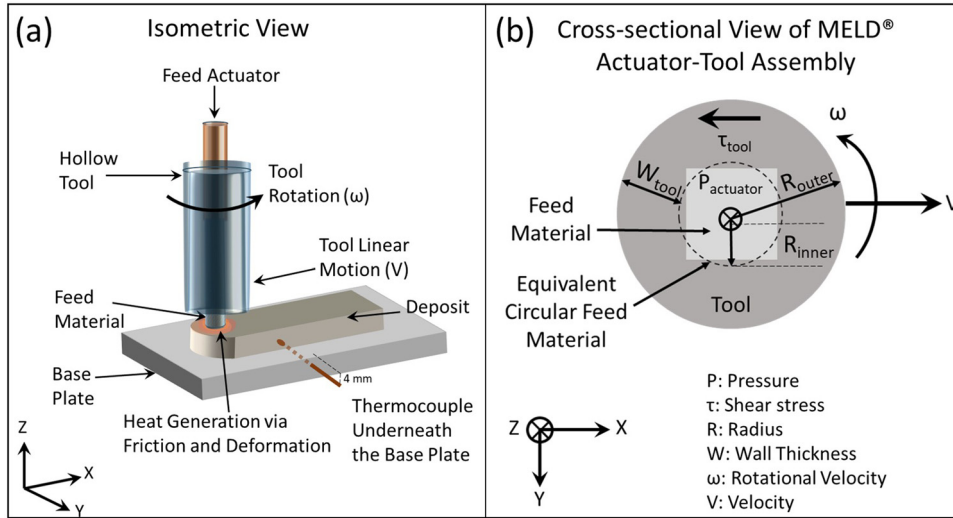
Schematic illustrations of (a) AFSD process using MELD® machine and (b) cross-sectional view of MELD® actuator-tool assembly and associated process attributes.
